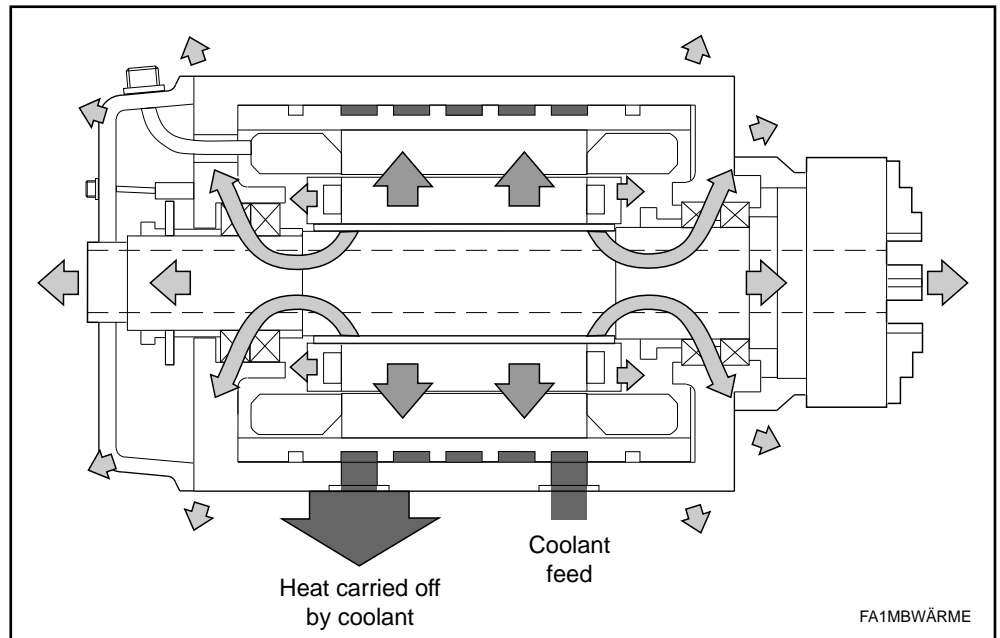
Heat flow in the motor spindle caused by the frameless spindle motor
